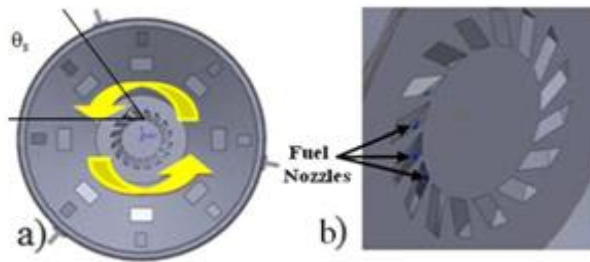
(a) Chamber inner view of swirl vanes; (b) fuel injectors
